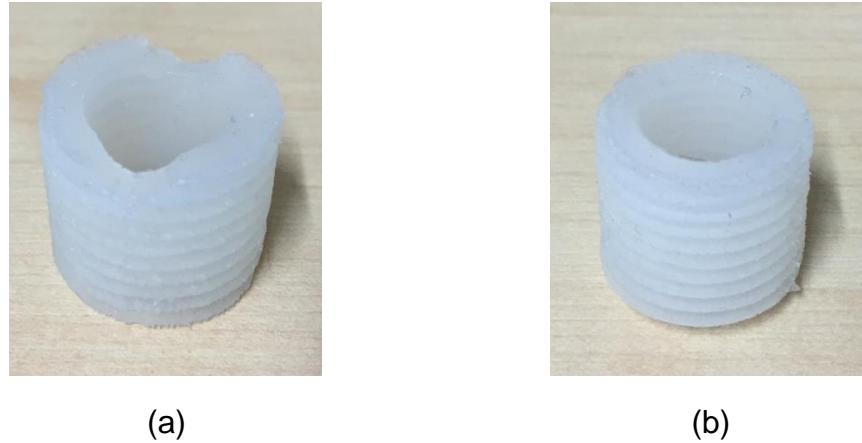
The bellow-like structure after demoulding. (a) Bellows-like structure for the revolute joint. (b) Bellows-like structure for the spherical joint.
